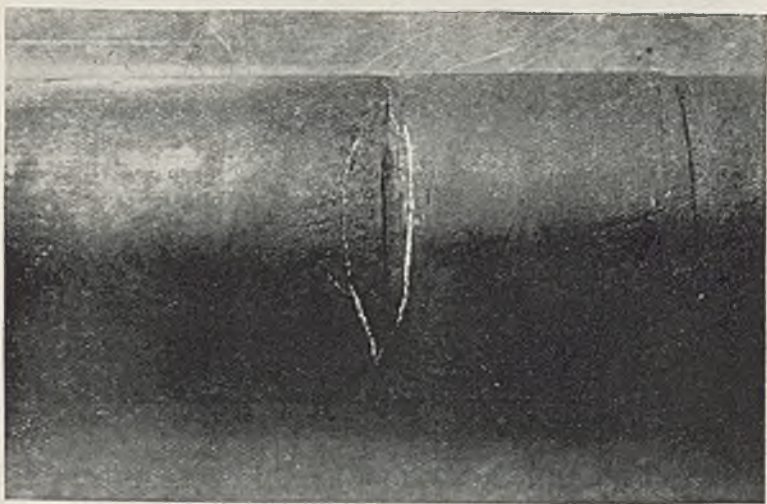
Corrosion-Fatigue Failure of an 8 in. diam. Pump Shaft : due to Leakage at a Joint, the Shaft was Subjected to a Drip of River Water.
